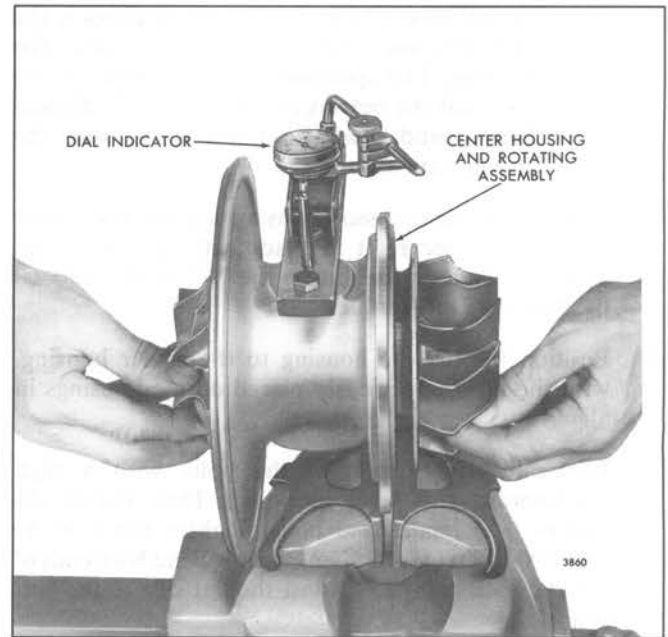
Checking Shaft Radial Movement with Tool J 21224
